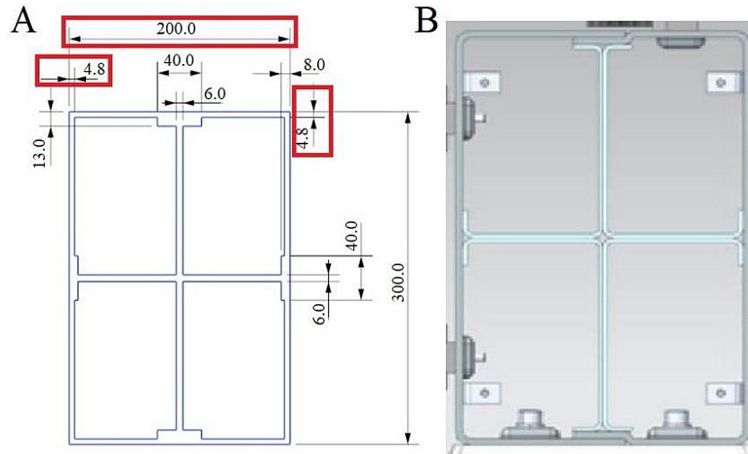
A. The geometric features of cross-sectional view composite beam. B. Cross-sectional view of the CAD model of the composite beam
